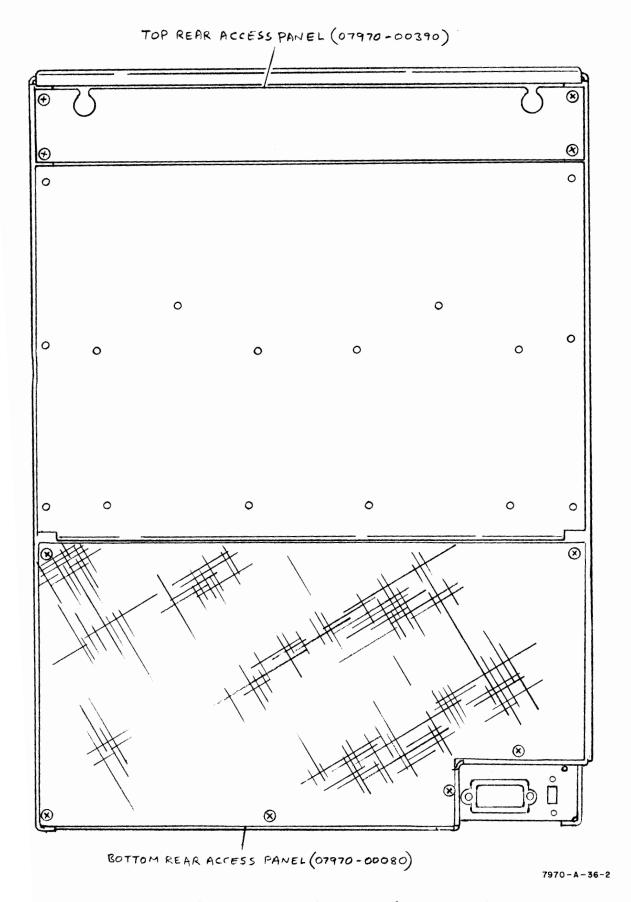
Cabinet Assembly (Sheet 2 of 2)
